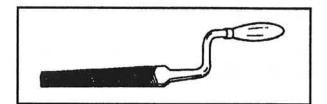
Modified file for filing rivet heads Countersunk-Head Rivet
